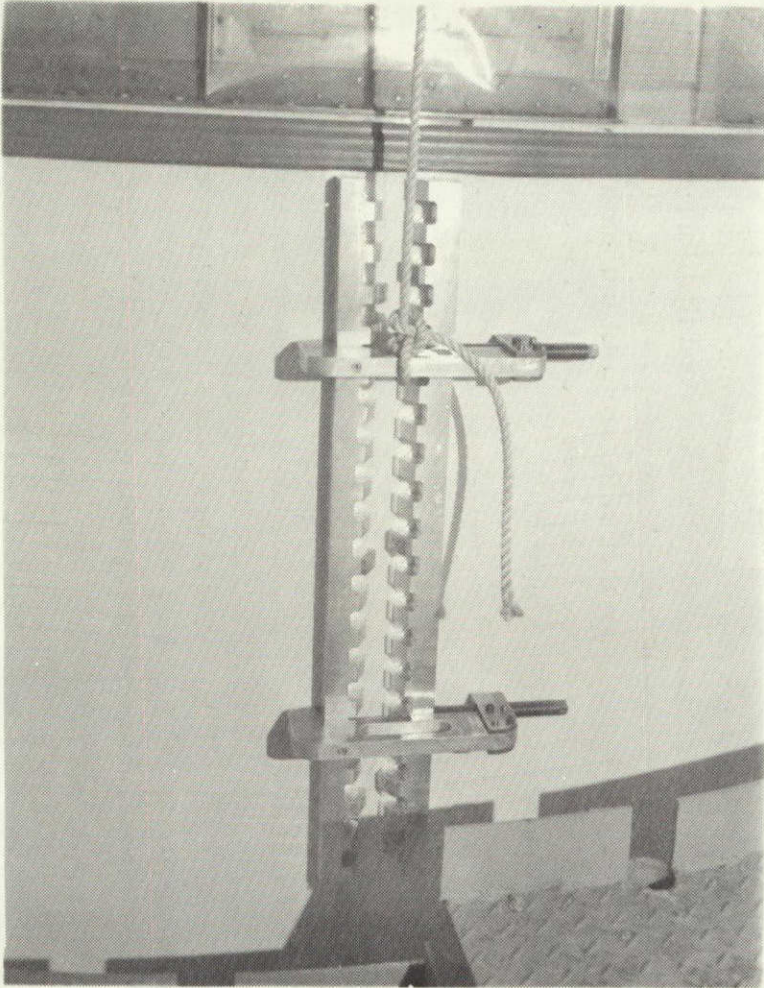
Constrictive Wrap Assembly Tool In Place Prior To Clamping The Constrictive Wrap
